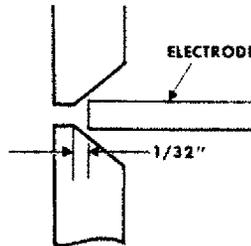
Correct arc length for welding in the horizontal position.
